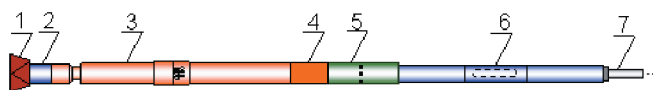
Bottomhole Television System for Coil Tubing Drilling:
